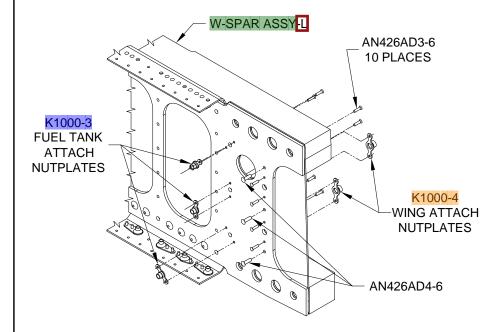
FUEL TANK AND WING ATTACH NUTPLATE INSTALLATION
